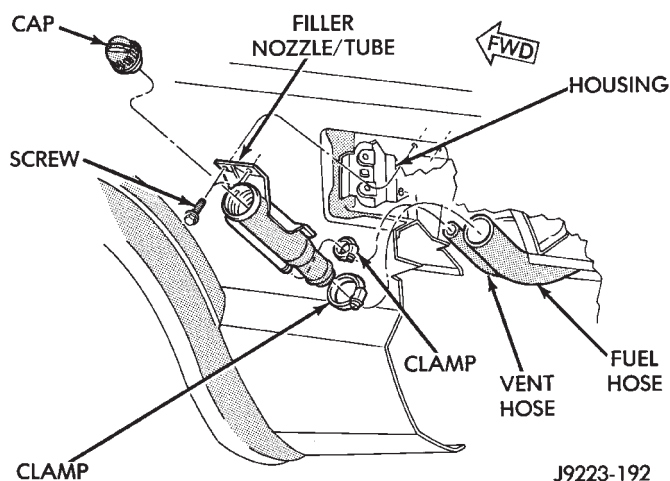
Fuel Filler Nozzle/Tube—XJ Vehicles
